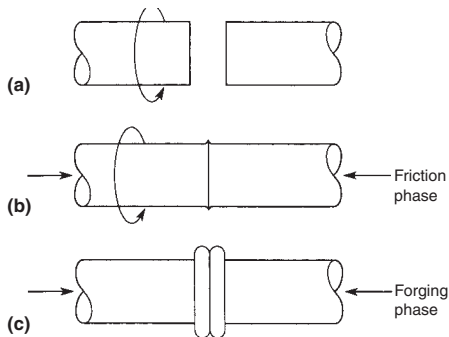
Schematic showing fundamental steps in the friction welding process. (a) One workpiece is rotated, and the other workpiece is held stationary. (b) Both workpieces are brought together, and axial force is applied to begin the upsetting process. (c) Workpiece rotation is stopped, and the upsetting process is completed.
